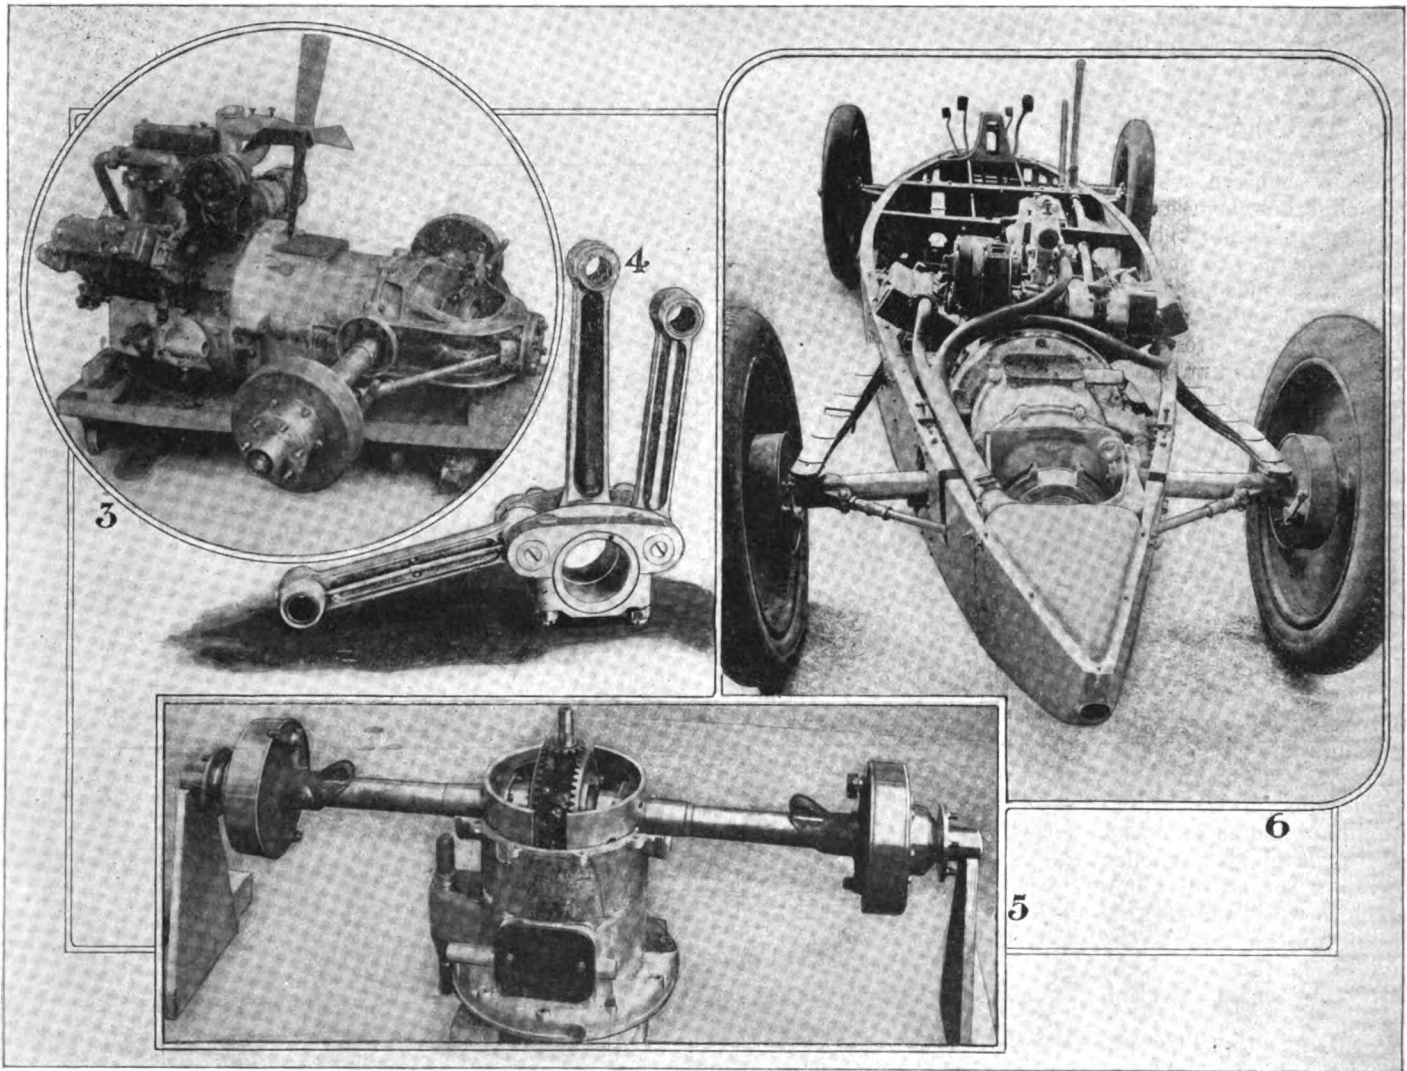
Power plant and rear axle complete. Fig. 4—Connecting rod assembly. Fig. 5—Rear axle with half of casing removed, showing guide shoes. Fig. 6—Three quarter rear view of chassis
